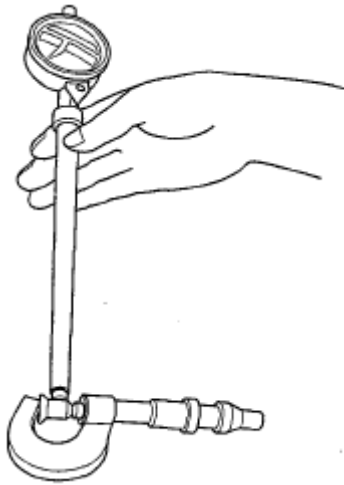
Identifying Zero Dial Indicator To Piston Pin Diameter
